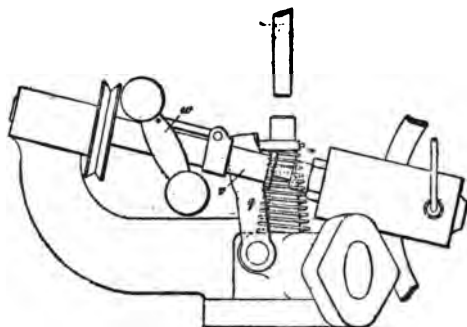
Modified Form of Roots' Governor for Petroleum or Explosive Engines (Front View).
